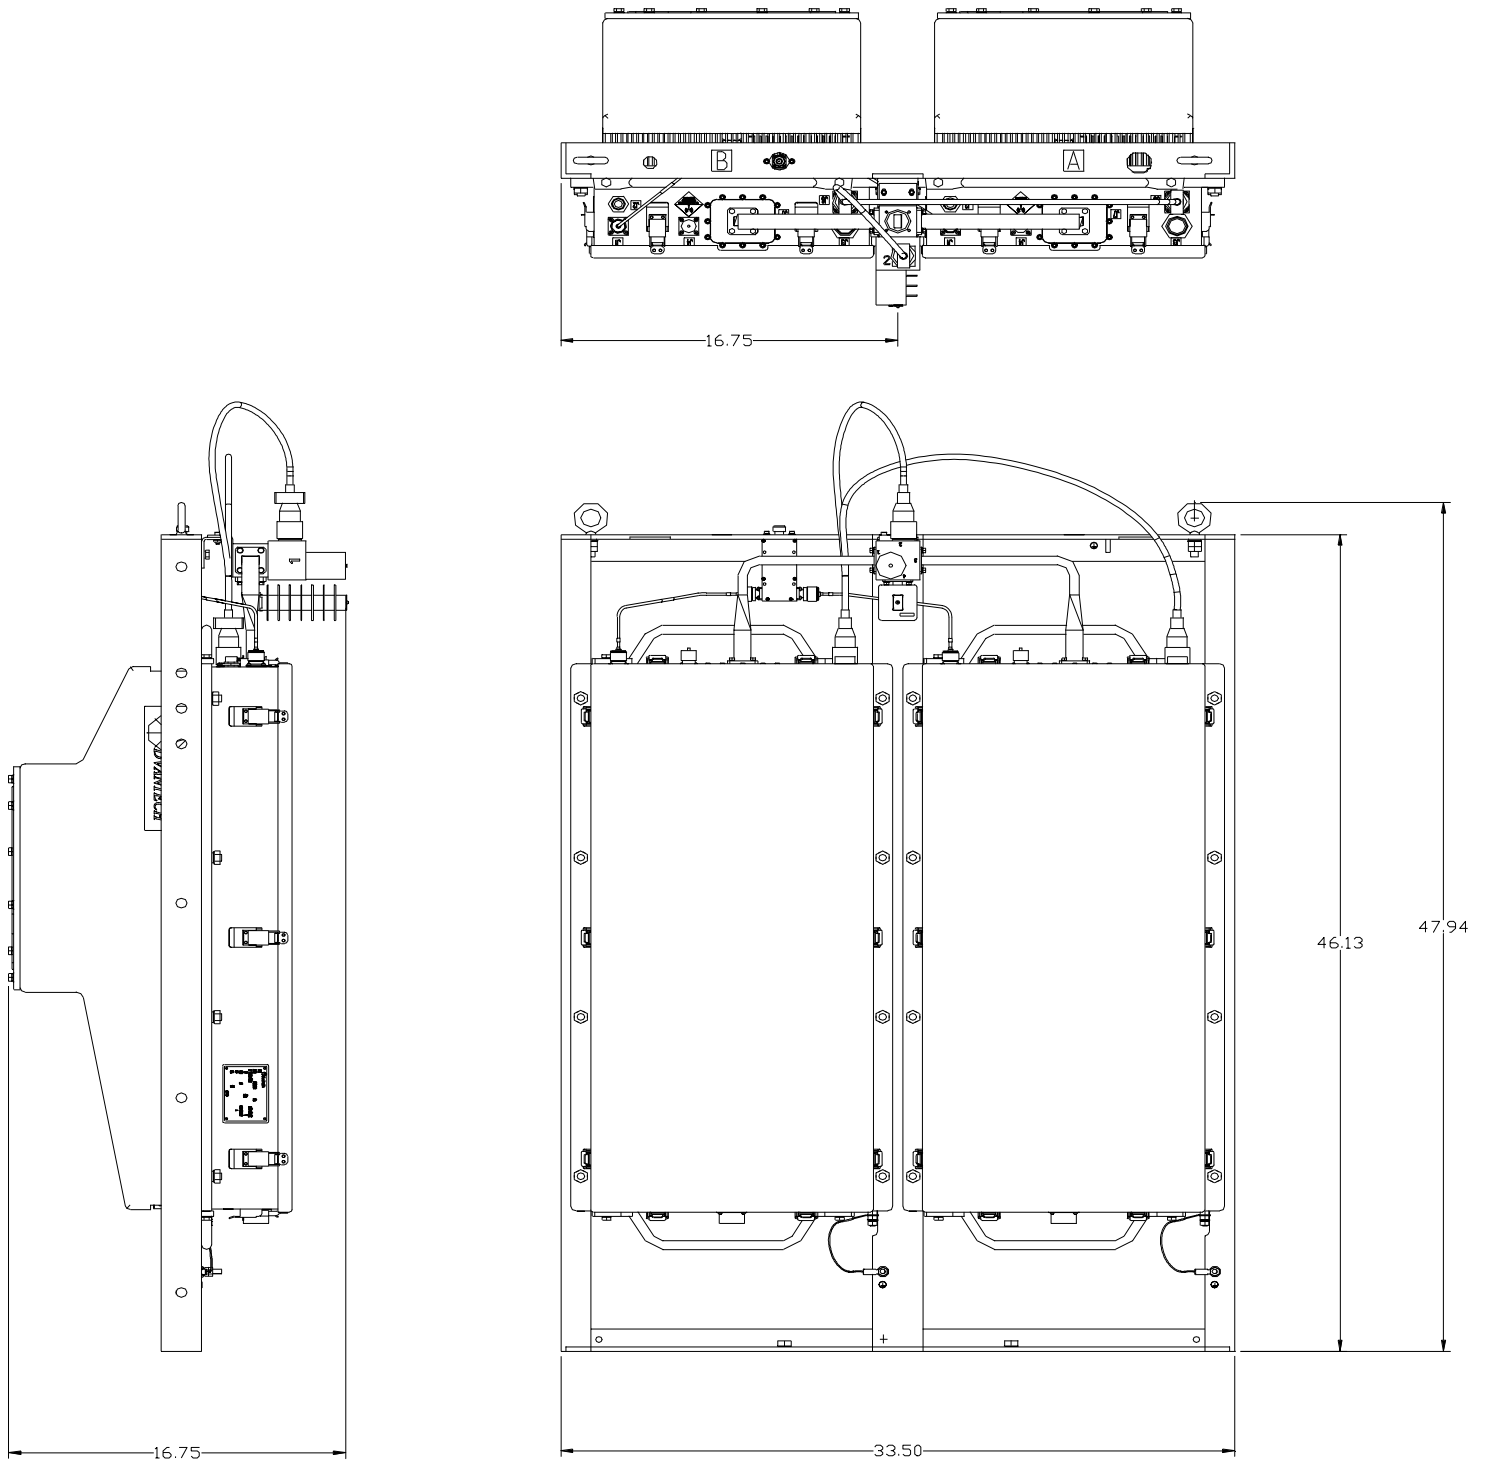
Product Outline (1:1 Redundant System with Mounting Frame)
